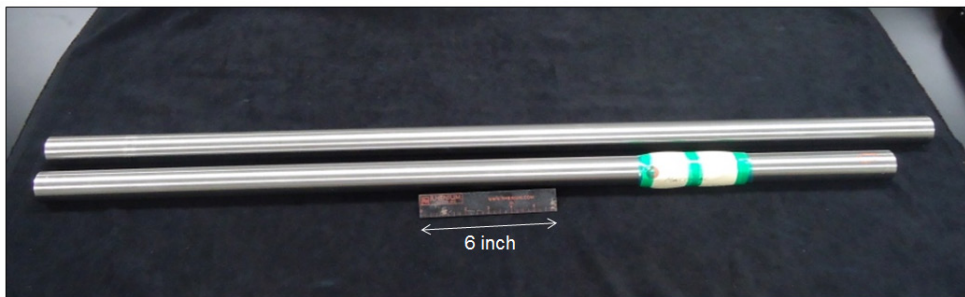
Machined master tubes at Rhenium Alloys, Inc. prior to tube drawing process.
